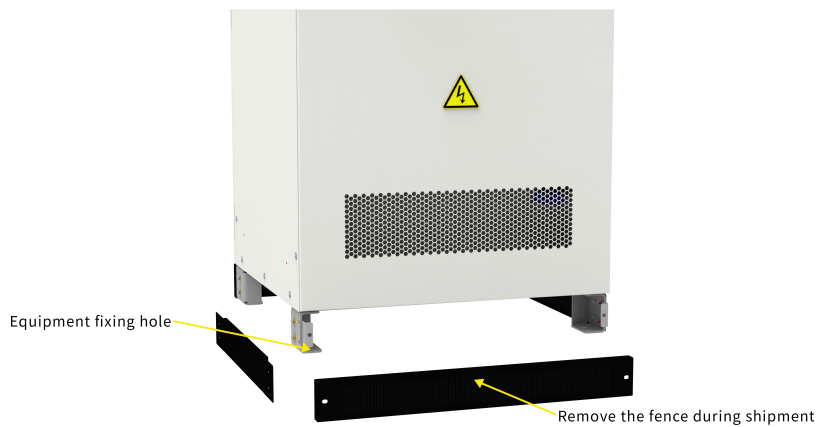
Schematic of bolt fastening at the bottom of the unit
